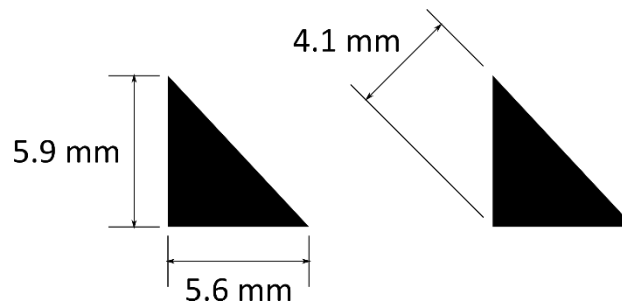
Profile of W3, W4, W5 and W6 weld beads
